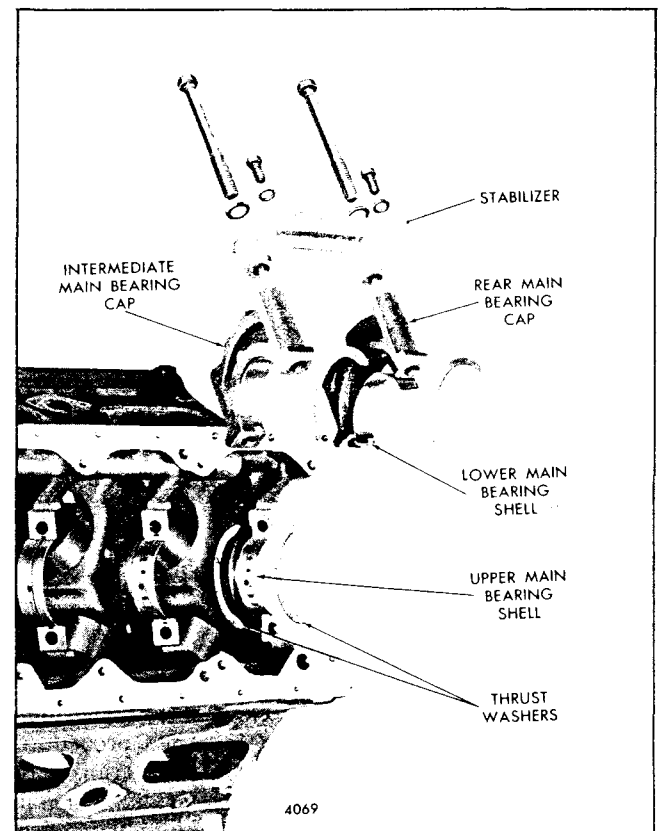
Main Bearing Shells, Bearing Caps and Crankshaft Thrust Washers -- V-Type Engines
